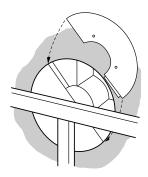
5. Fit the cover plate over the rotor centre. Use the M5 ∞ 12 mm long countersunk head screws supplied.
